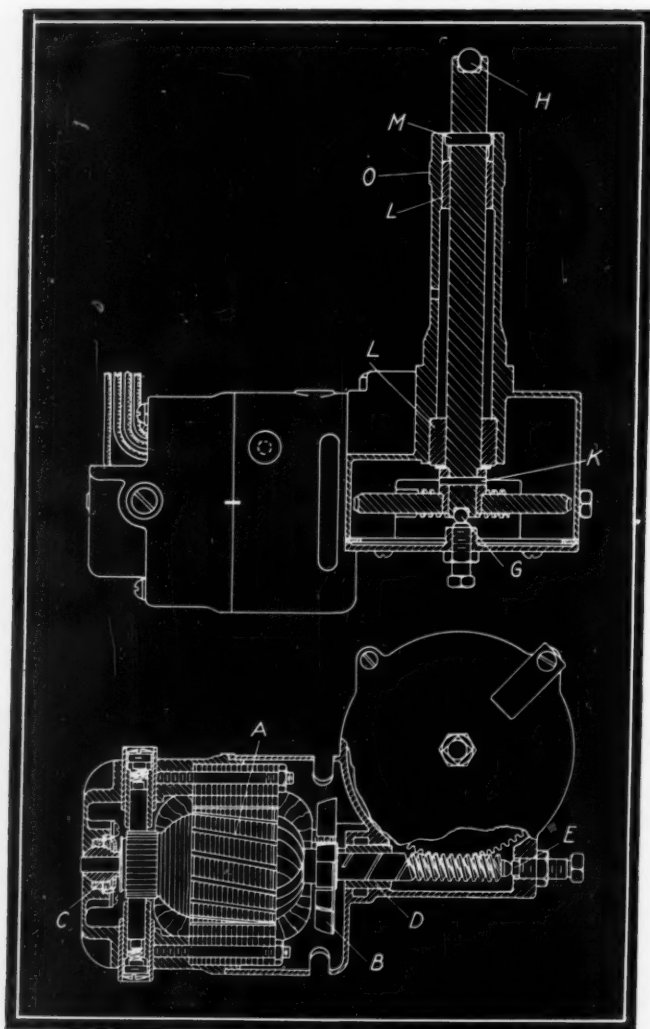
Bearings which support the armature shaft as well as all other bearings are of composition material
